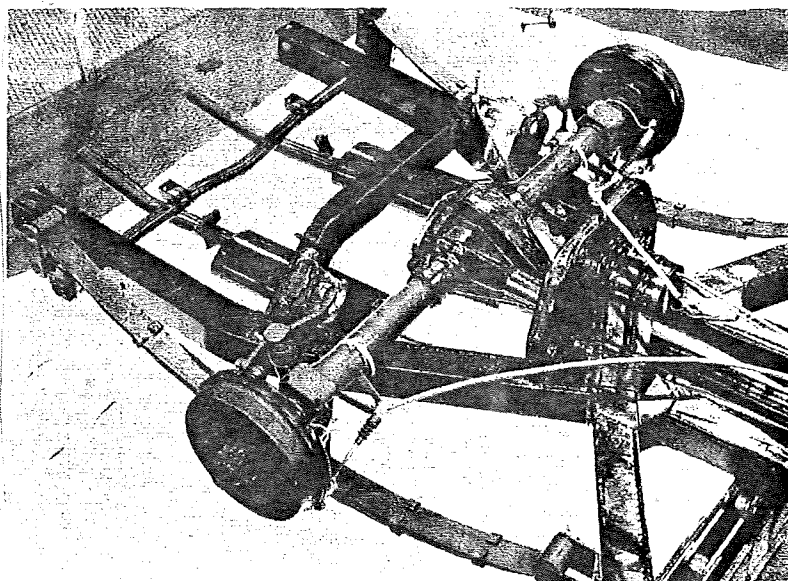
Photograph Of Solid-Axle TR4A Rear Suspension
